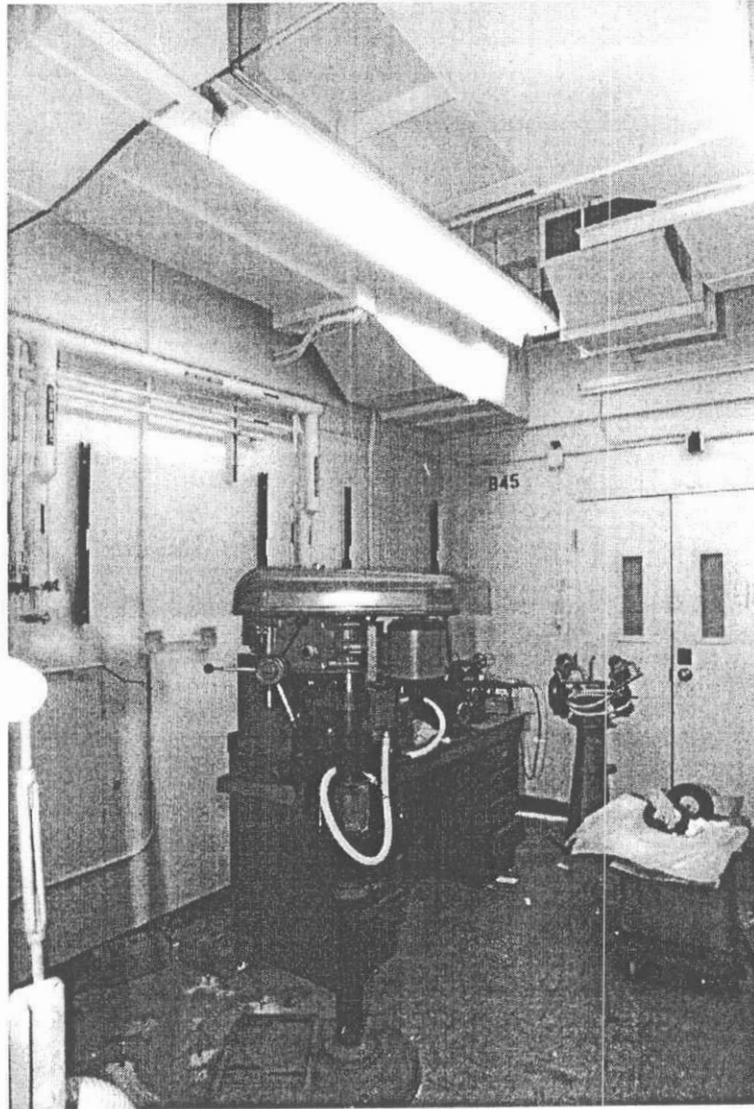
Typical equipment, piping, and ducting in the former Helium Laboratory.
